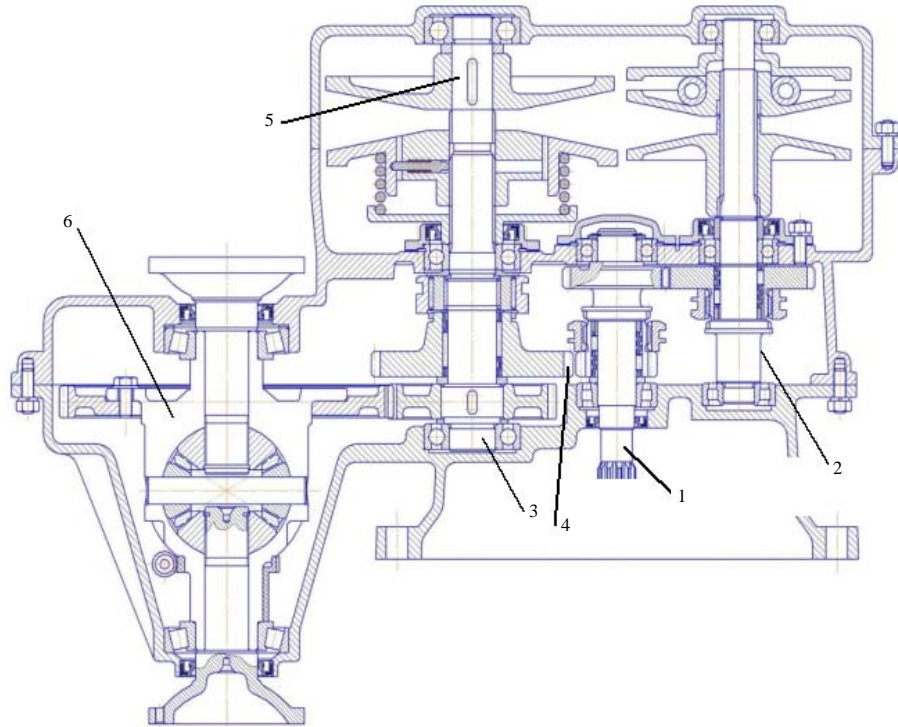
The layout of the shafts in the gearbox: 1) Primary shaft; 2) the drive shaft of the variator; 3, 5) Variator driven shaft; 4) Shaft used for reverse rotation and 6) Differential housing
